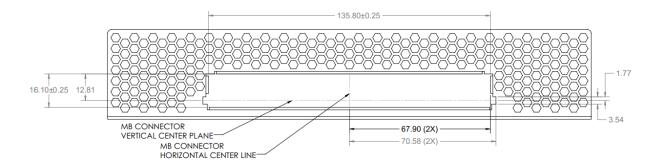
LFF Baseboard Chassis CTF Dimensions (Rear View)
